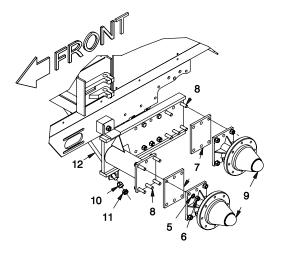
Mounting Spacer Plates, Hubs & Truss Rod
